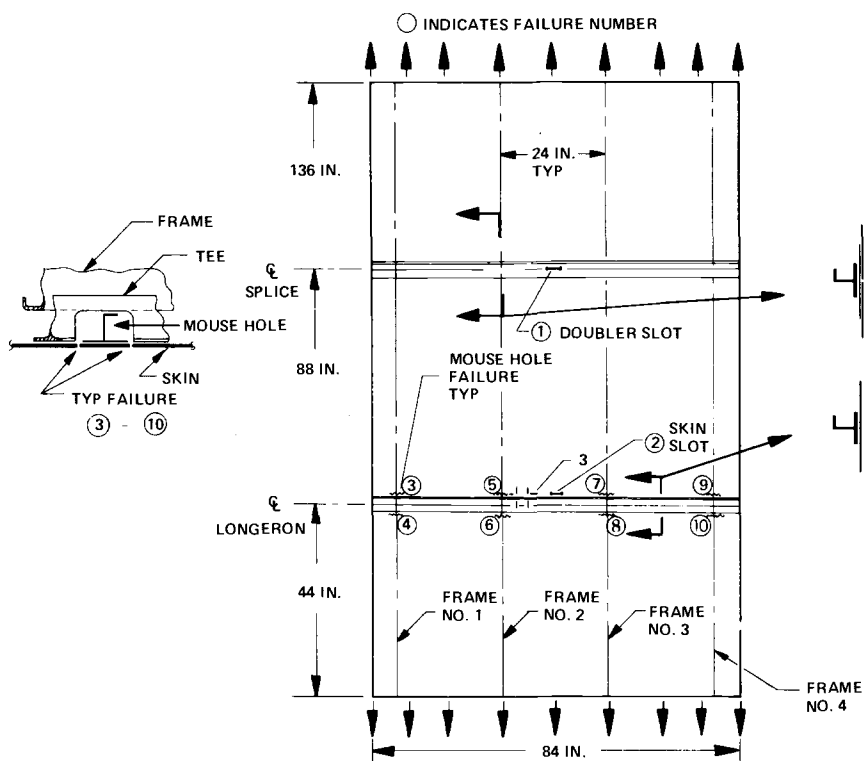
Internal longeron test—failure locations (1 in. = 2.54 cm).
